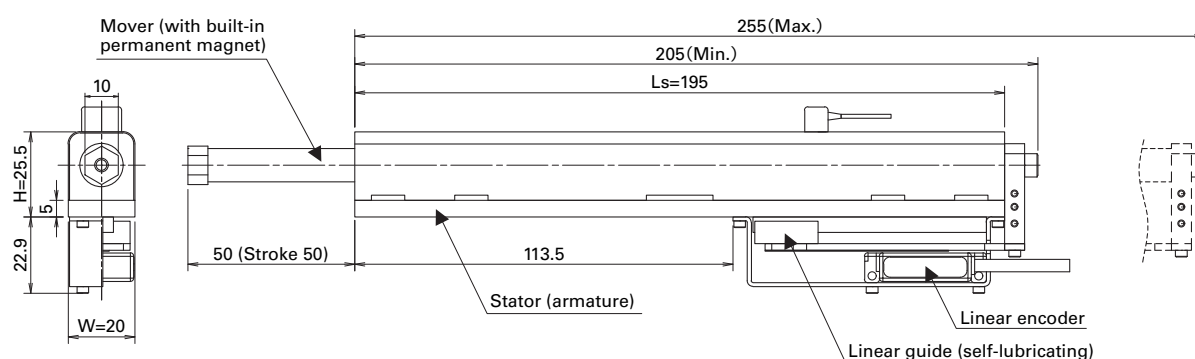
Composition and dimensions of the 20 mm wide compact cylinder linear servo motor
